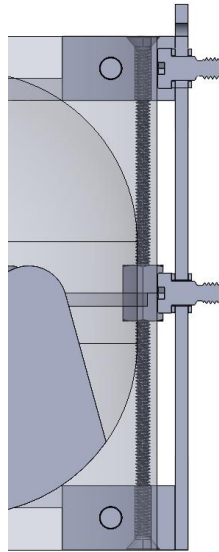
A section view of a tank and mounting plate showing the shoulder bolts and PTFE washers.
